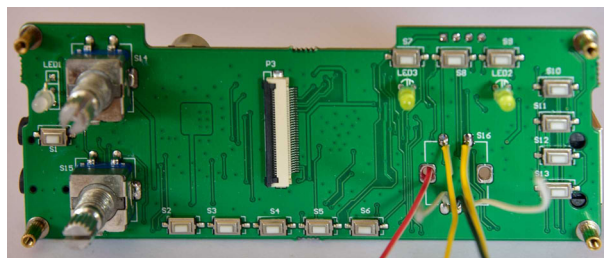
Red wire standing out 5 cm from the board and yellow, black, grey and white wires soldered to the encoder pads.
